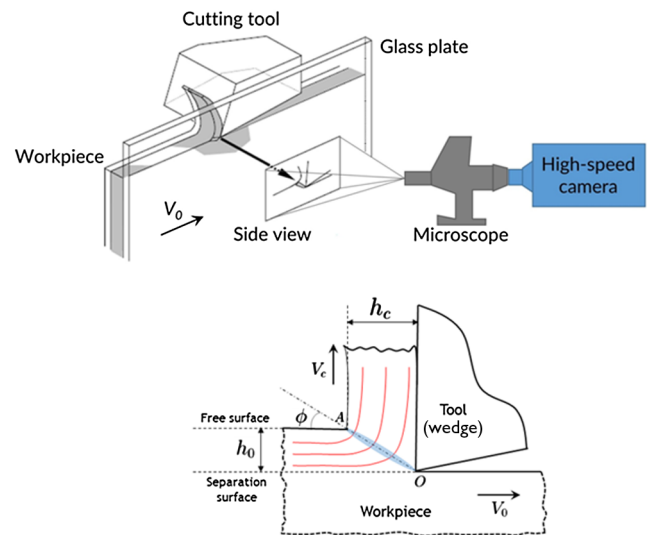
Schematic of plane-strain cutting. (Top row) Experimental setup showing a tool-workpiece interaction and a high-speed imaging system. (Bottom row) Side view showing the plane of deformation. The workpiece material is deformed by the tool into a chip, here depicted as occurring by smooth laminar flow (the red lines) with shear concentrated in a narrow shear plane or zone (shown in blue).
